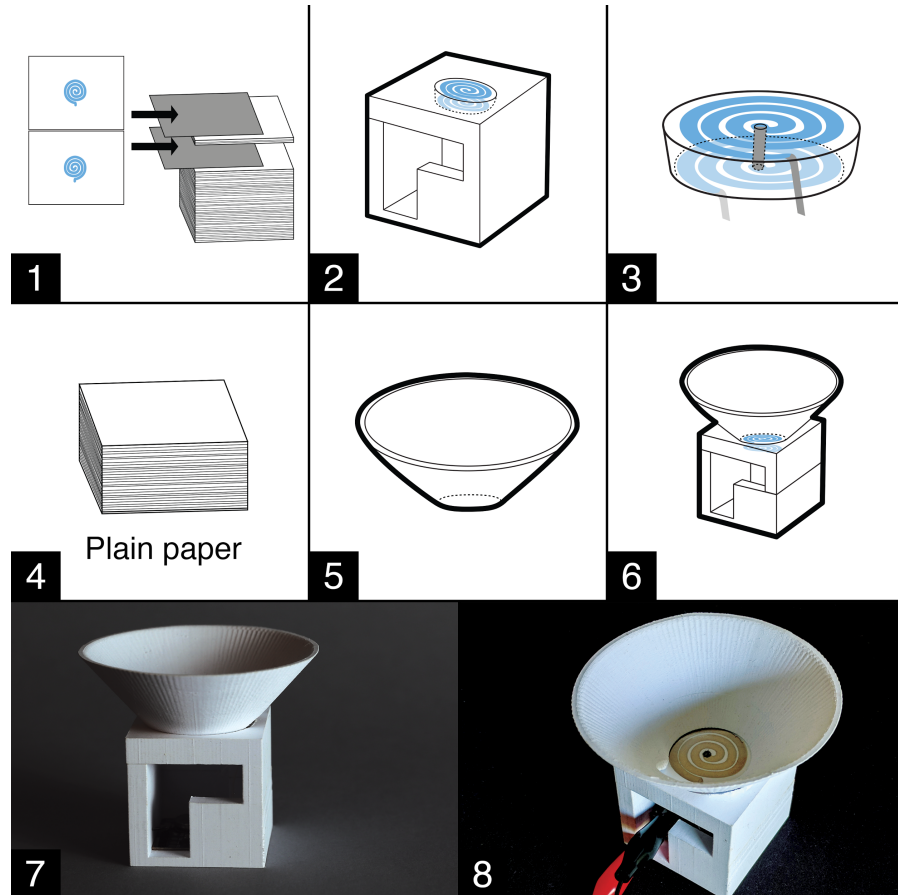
Fabricating a speaker: (1) inserting two printed coil layers into a stack of paper; (2) sculpting a speaker with coils on different layers; (3) connecting coils by injecting conductive epoxy into cross-layer channels; (4) preparing a stack of paper; (5) sculpting a cone; (6) attaching it to the body; (7) the combined model; (8) connecting the coil to a melody circuit.
